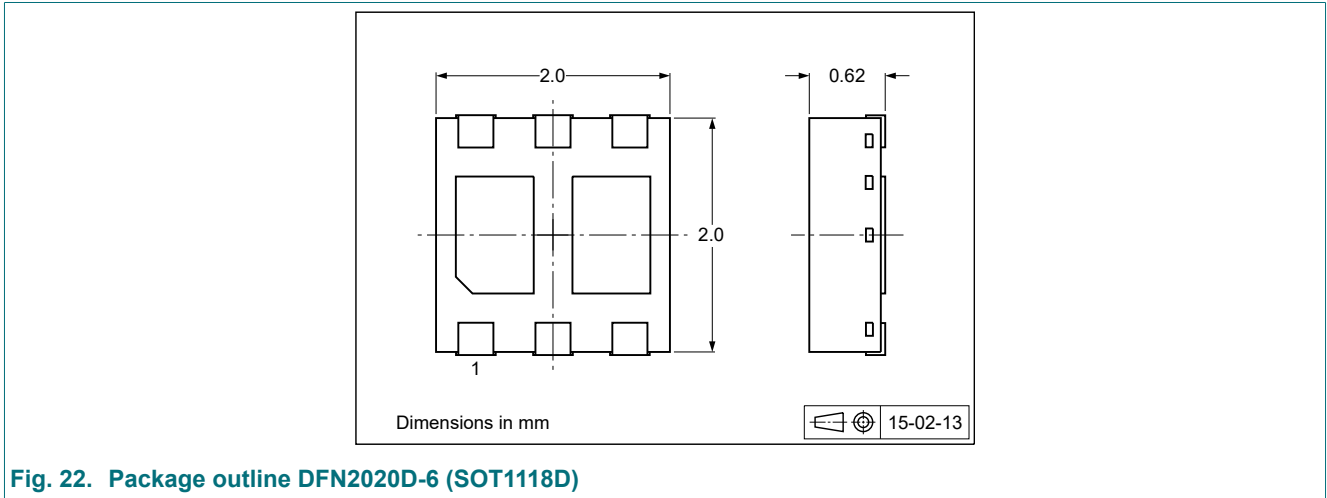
Package outline DFN2020D-6 (SOT1118D)
